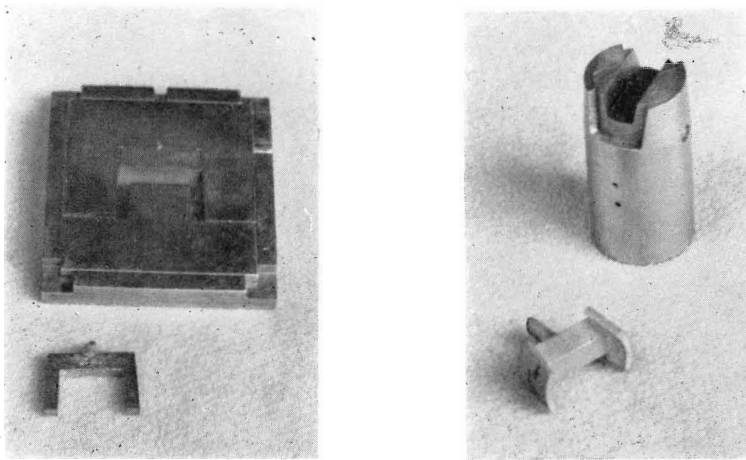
The original molds for making wax patterns and measuring dimensional changes of castings: Left. U-form, Right. M-O-D form.
